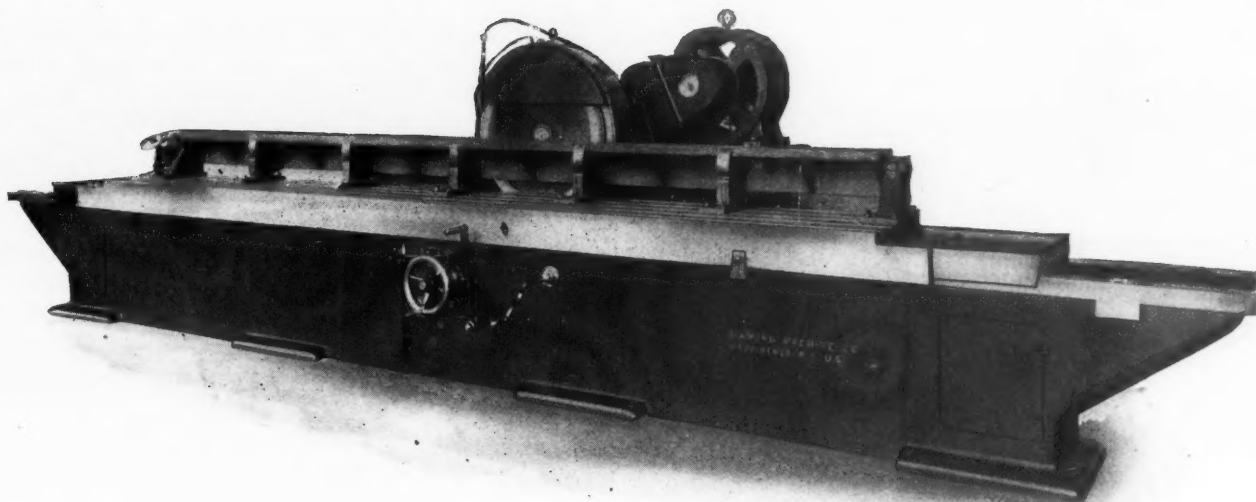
Diamond Shear-blade Grinding Machine, said to be the Largest Grinder of its Kind ever built
